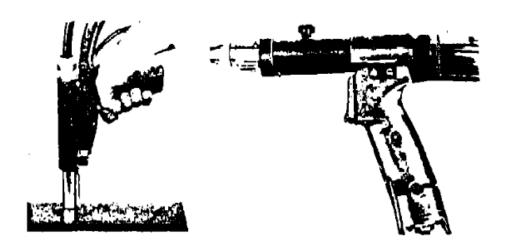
TYPICAL SEMIAUTOMATIC GAS METAL ARC WELDING PISTOL GUN DESIGNS
